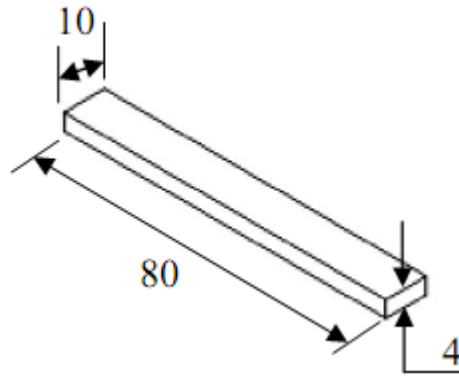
Flexural strength specimen (all dimensions are in mm)
